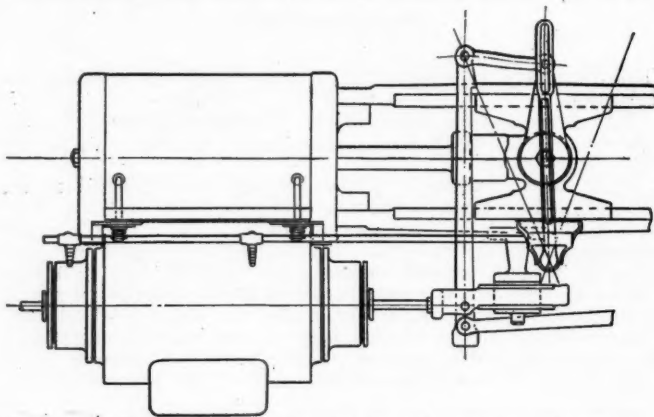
Indicator Reducing Motion for Laboratory Tests
